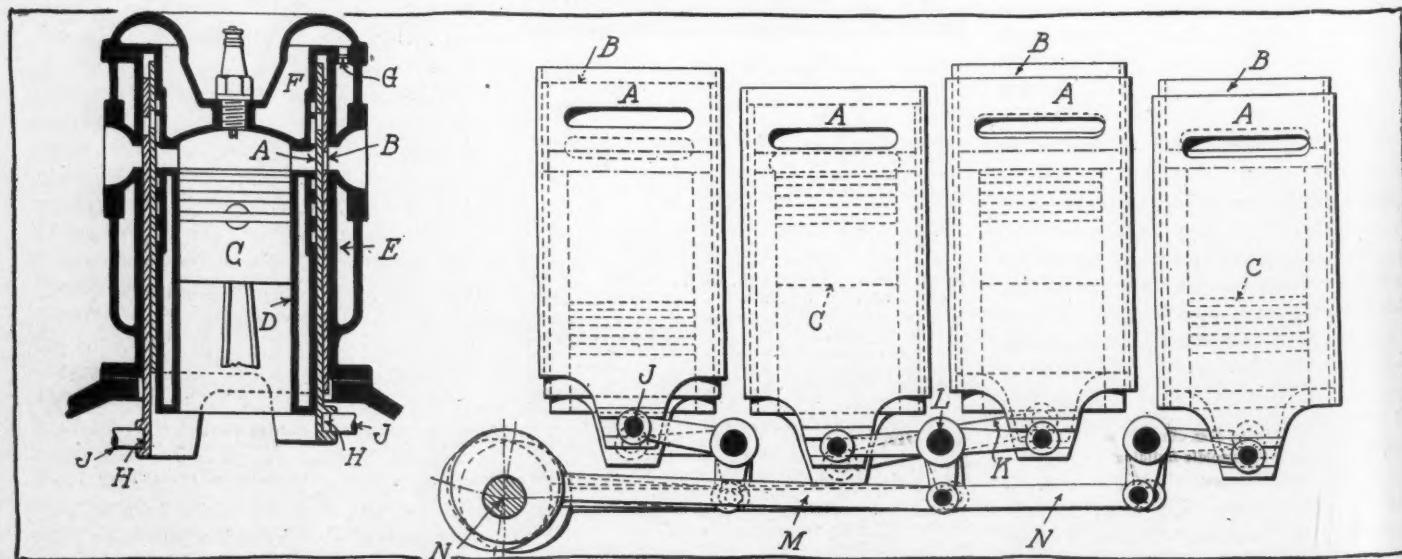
SHOWING CONSTRUCTION AND OPERATION OF SLIDE VALVES IN RILEY MOTOR
